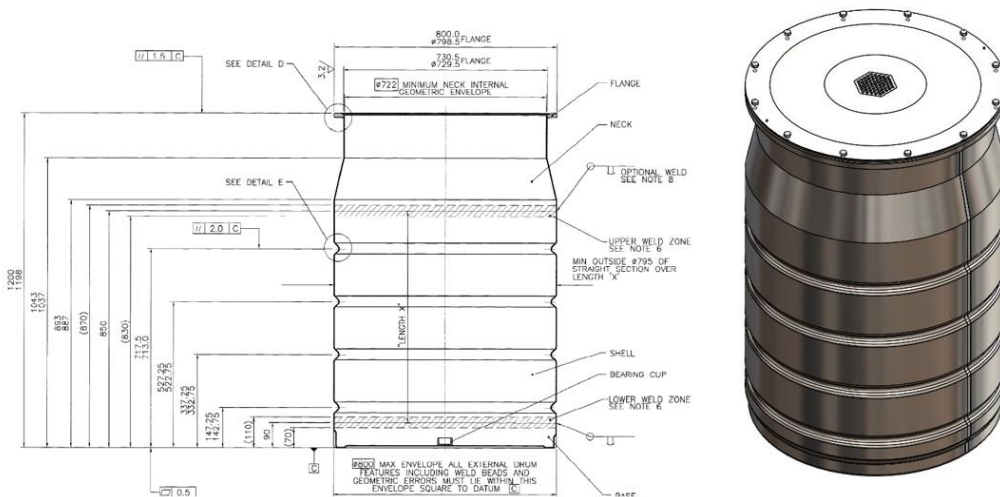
(Left) Section view of manufacturing drawing of 500 L drum acquired from B.N.F.L. (Right) 3D rendered model of 500 L drum created from B.N.F.L manufacturing drawing.
